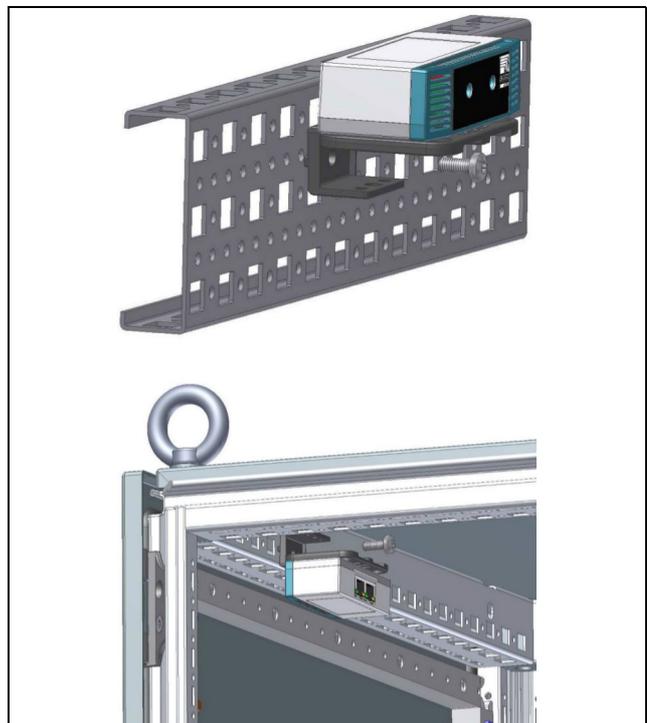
Mounting the sensor in the enclosure or IT enclosure
